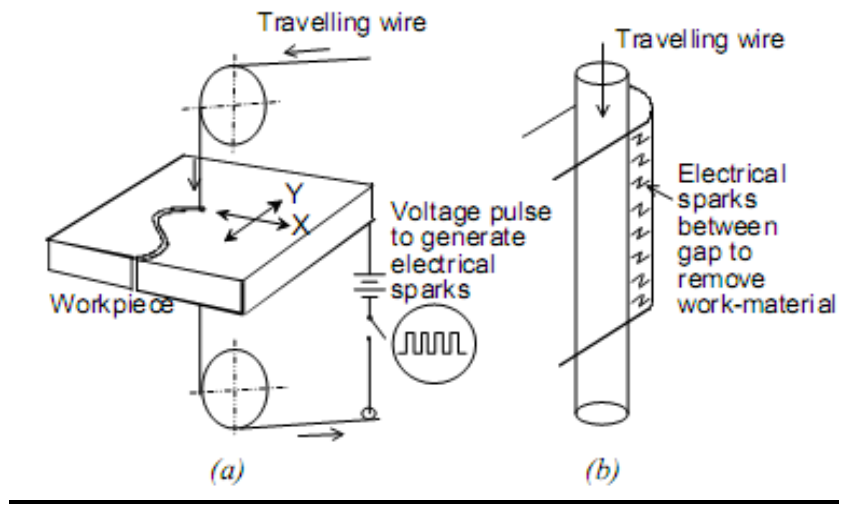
The Wire EDM Process (a) Conventional 2D Wire EDM operation
